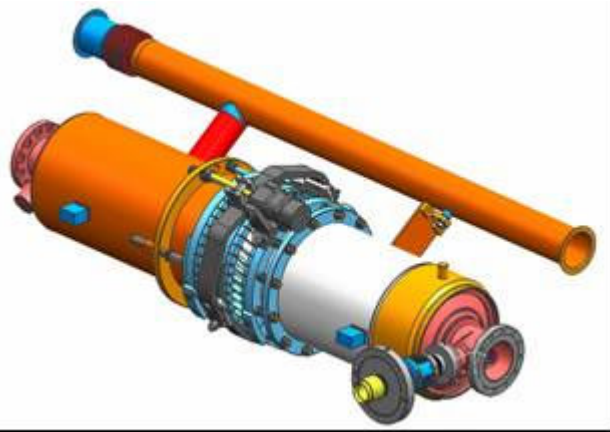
The cavity dressed with the modified helium tank and piezo blade tuner.
